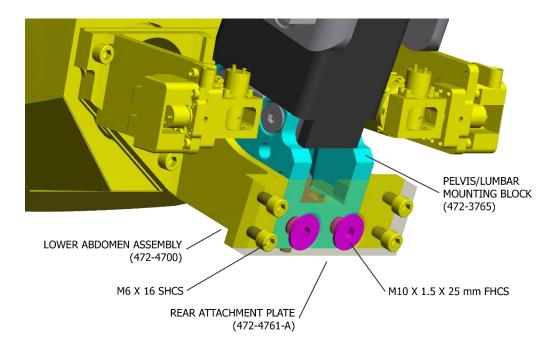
Attach the Lower Abdomen Assembly to the Spine Assembly
